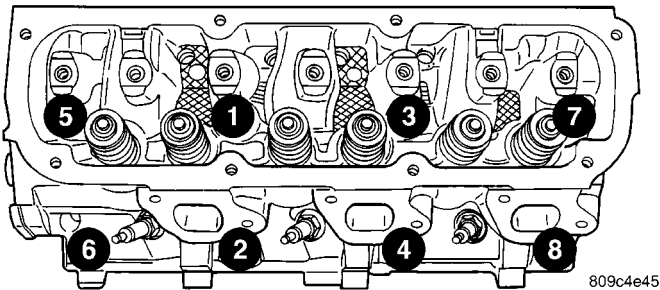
CYLINDER HEAD TIGHTENING SEQUENCE
